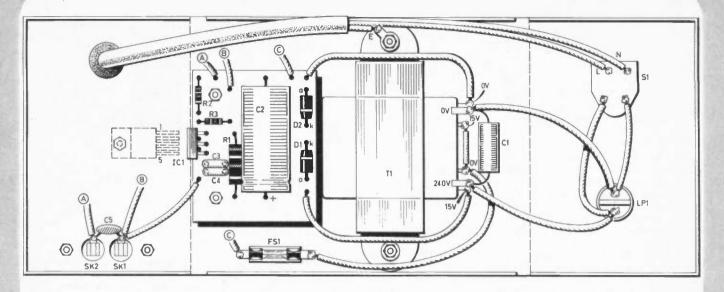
Component layout on the topside of the p.c.b. with full interwiring details. As shown, SK1 and SK2 are spring loaded terminals.
